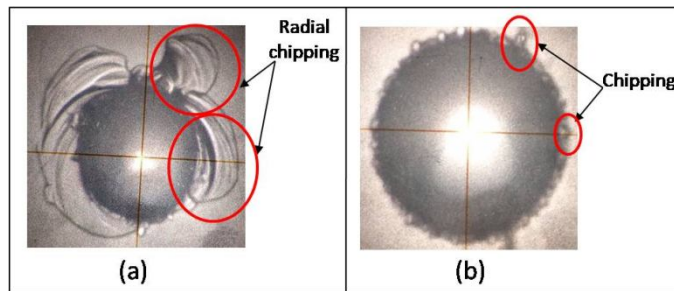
Profilometer images of machined blind holes by the pinpointed conical tool (a) By conventional drilling (CD) (b) By rotary ultrasonic drilling (RUD)
